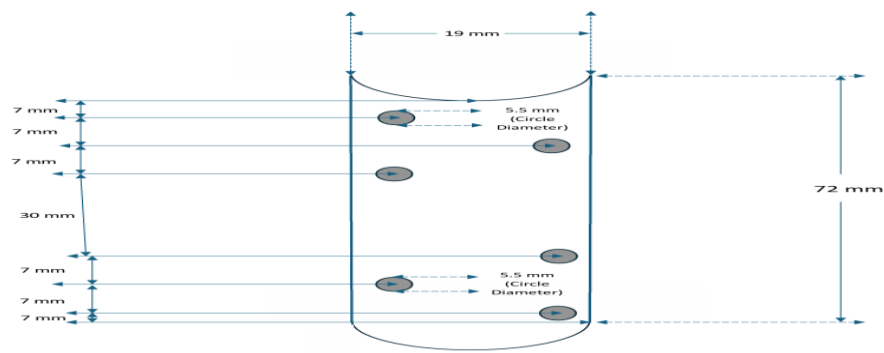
Raw design and dimensions of the radius bone plate (Upper view)
